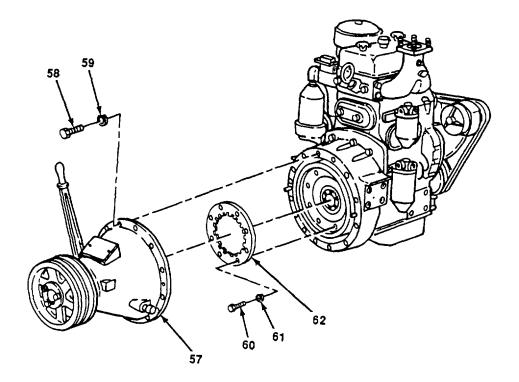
Engine Assembly, Installation (Sheet 1 of 4).
